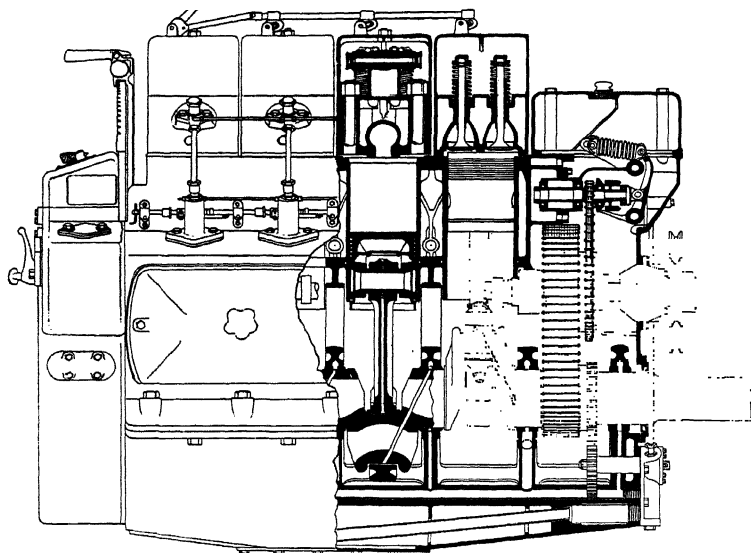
Force-feed oiling applied to high-speed Diesel engine. (Courtesy Socony-Vacuum Oil Co.)
